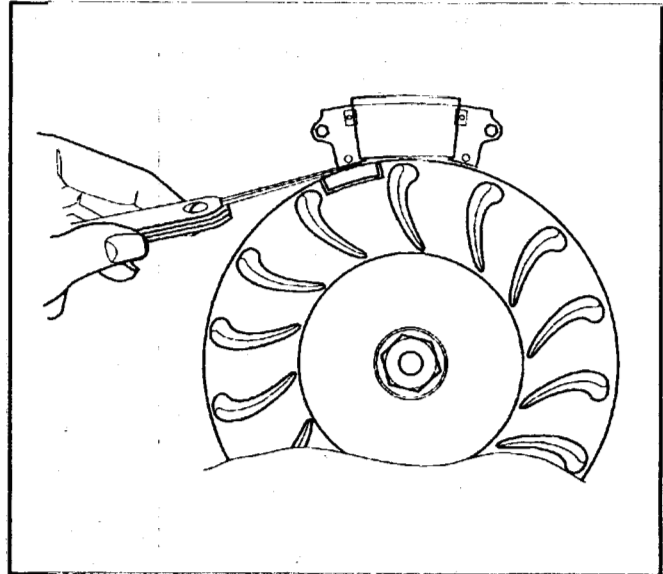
COIL/FLYWHEEL CLEARANCE
